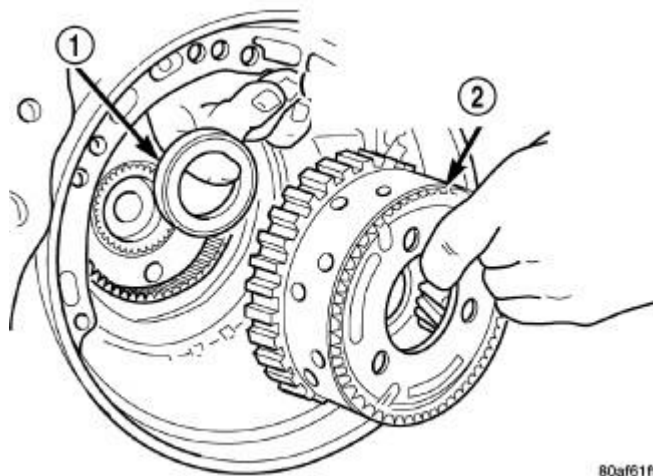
Remove/Install Front Carrier/Rear Annulus
